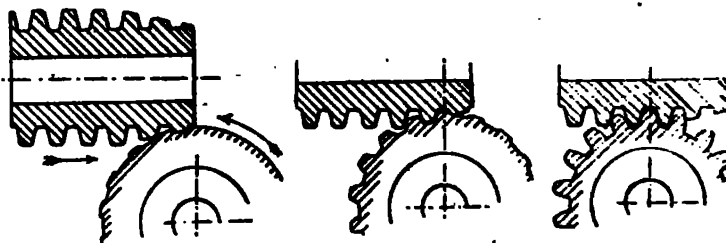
Reinecker Hob Cutting Worm Wheel.
